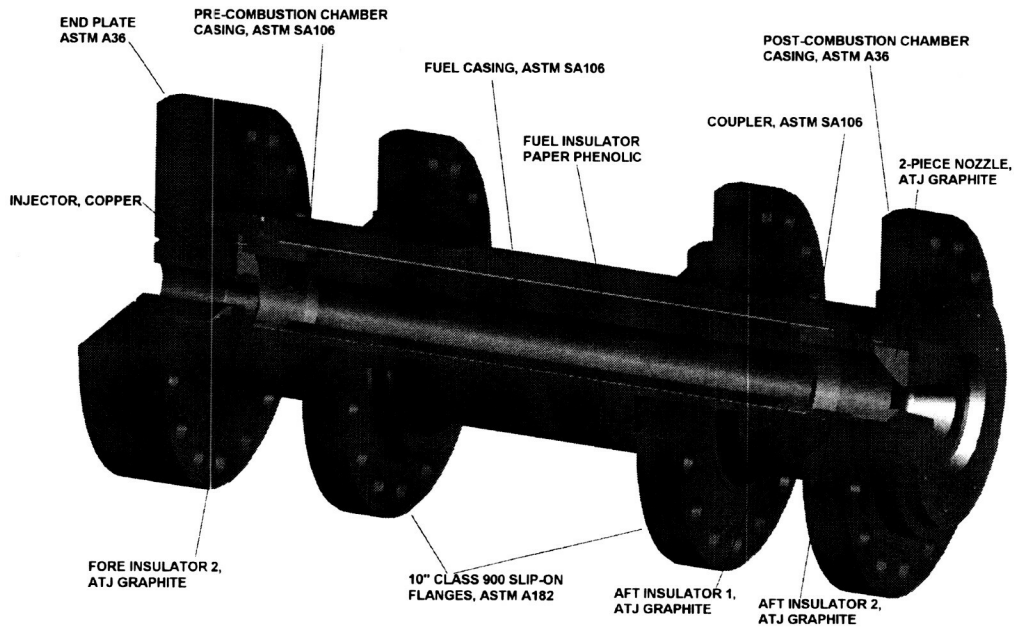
Perspective view of combustion chamber (with short coupler installed).
